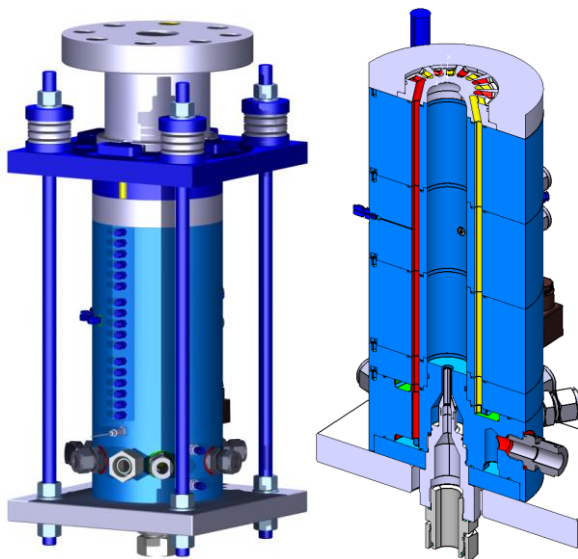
CAD illustration and schematic sketch of cross-sectional view of HOC2 showing the cooling channels
